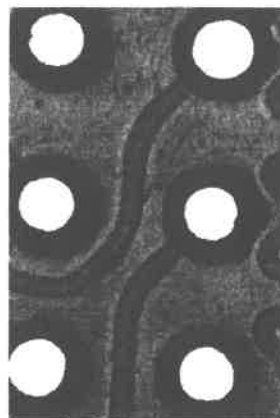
Surface finish of an array of diamond turned solder balls after parameter adjustments
